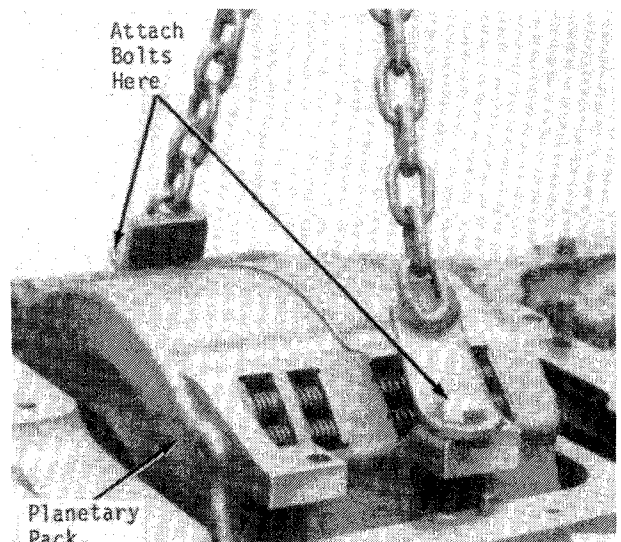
Attach suitable lifting eyes at tapped holes in planetary housing, then use a hoist to lift out output planetary assembly.
